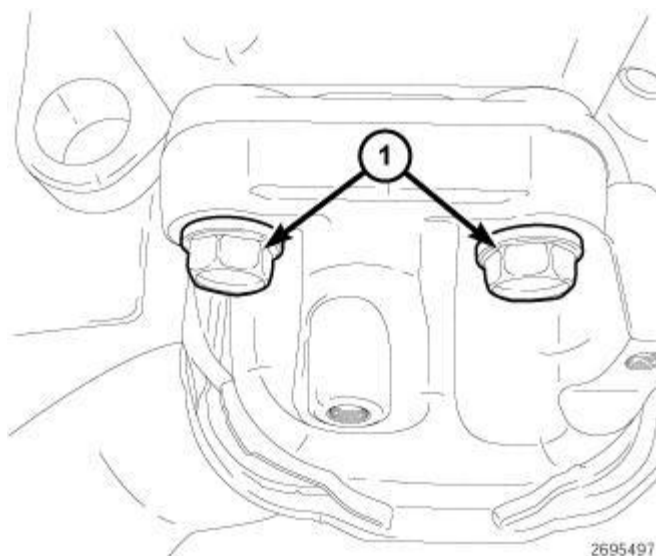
RIGHT ENGINE MOUNT RETAINING BOLTS
